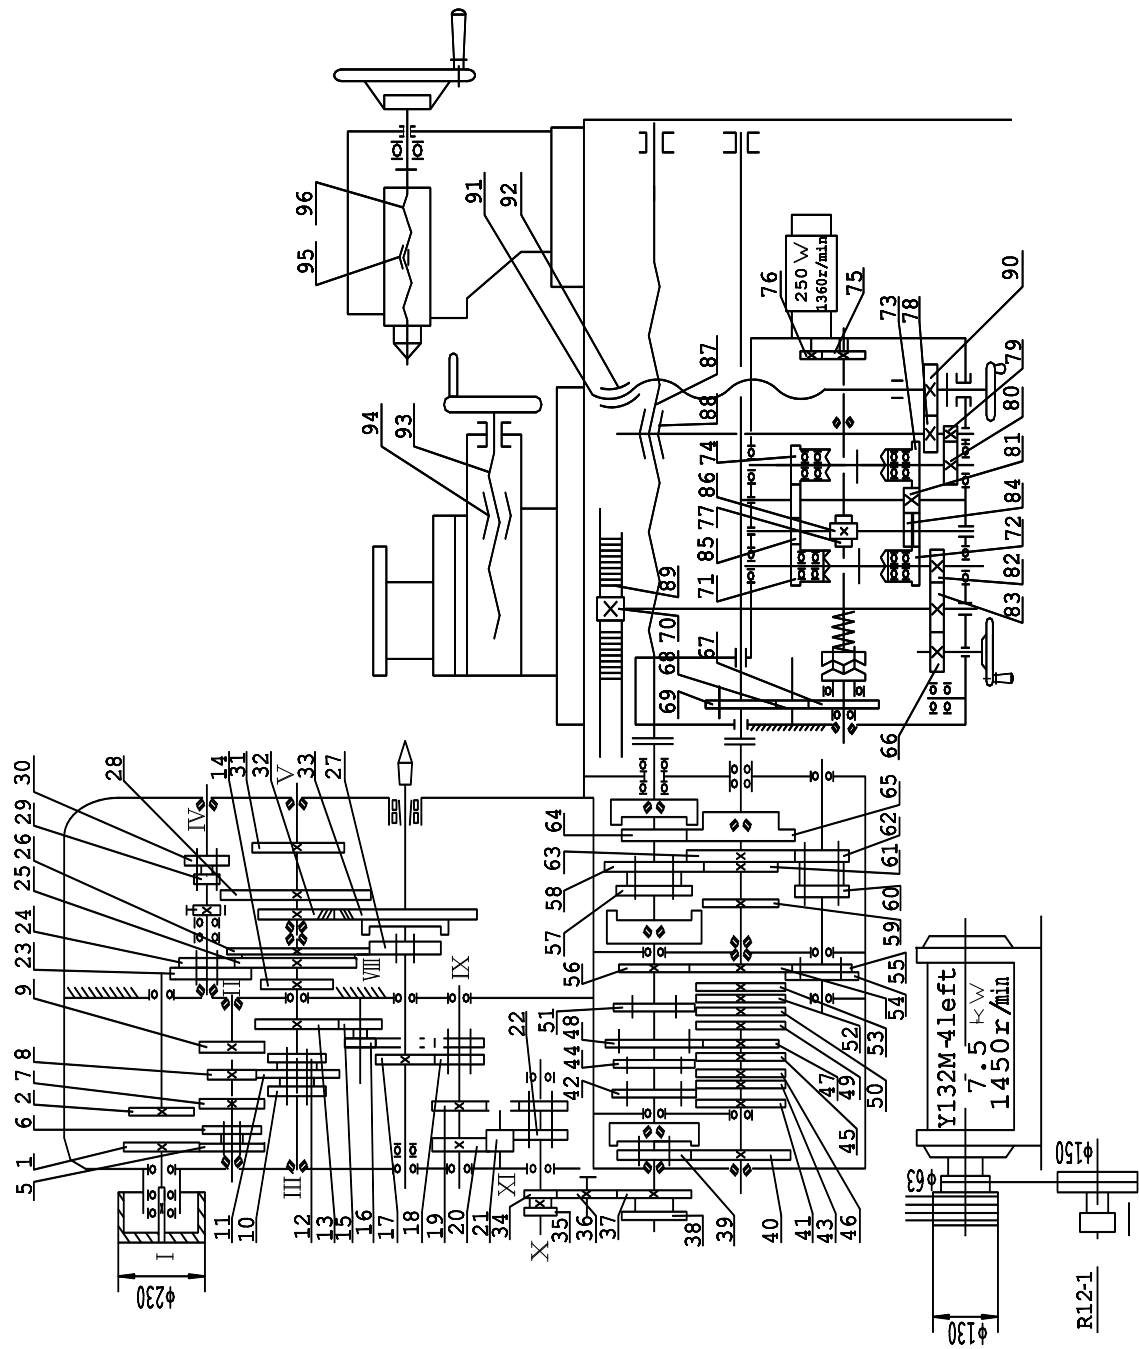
Driving system drawing of the machine with foot-pedal braking device
